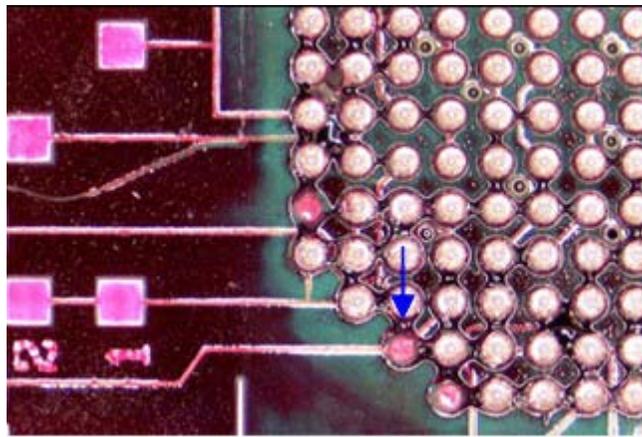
Dye Penetrant Testing of Corner Solder Joints
